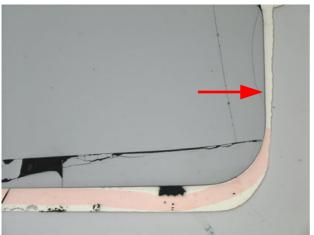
Saw tooth with fracture line between the hard metal. Magnification 100:1. Photo Brazing Centre Hanau. Lack of stress dissipation in the
